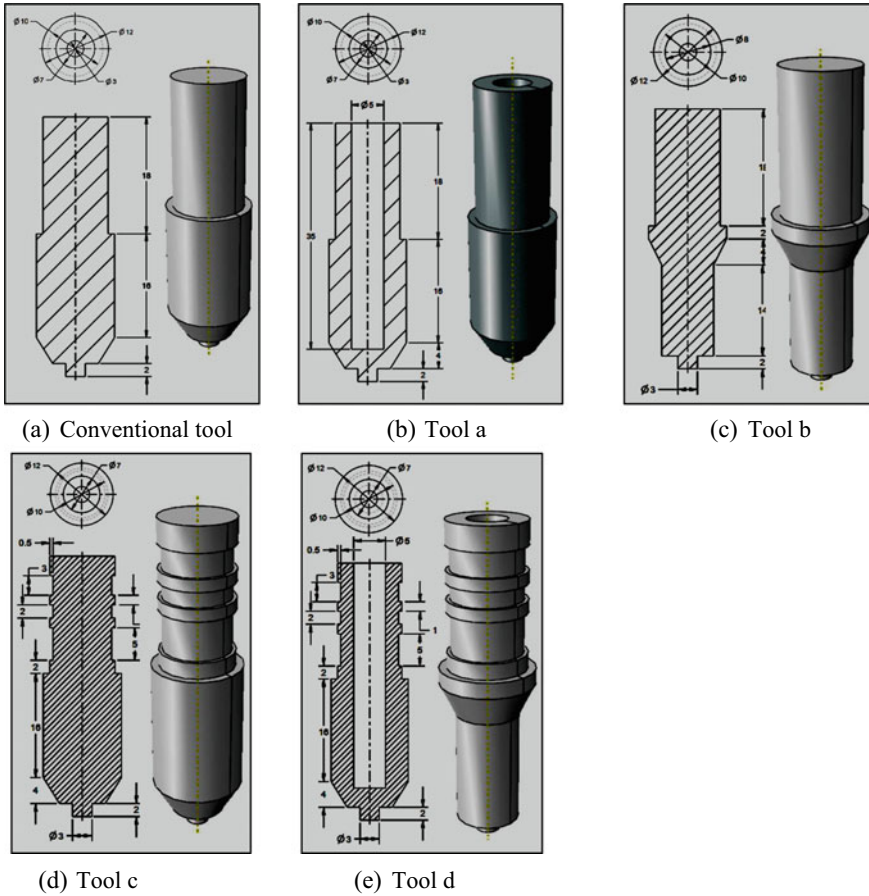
Different configurations of FSW tool (All the dimensions are in mm)
